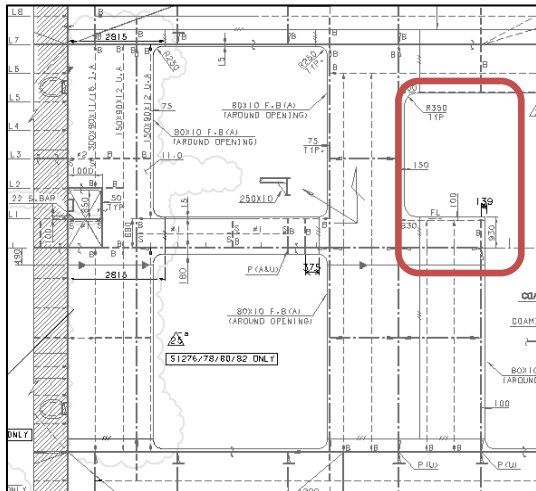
The structure drawing of engine room deck around heavy spare parts
